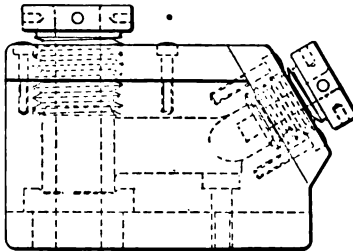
Jig for Drilling Work Shown in Fig. 59.
